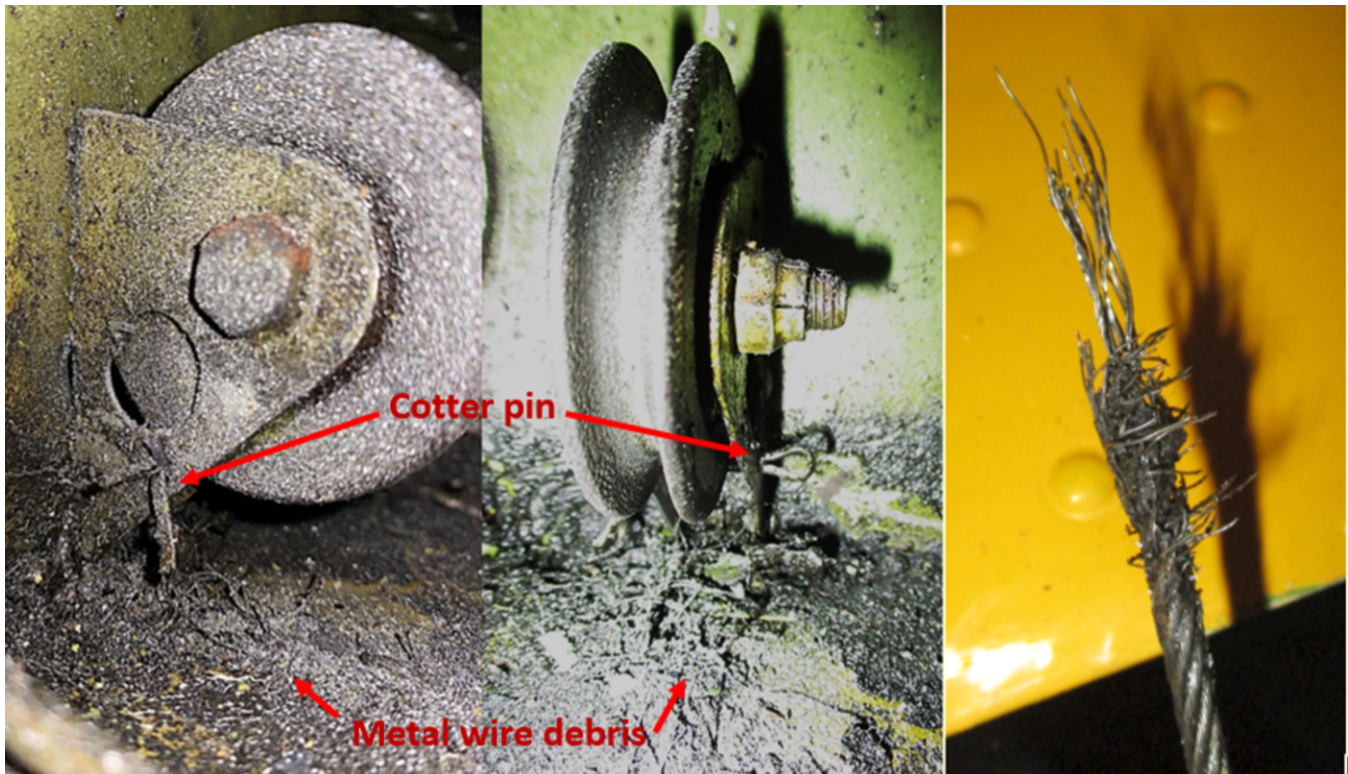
Photographs of the left and right side of left rudder cable pulley and the fractured left rudder cable forward end.
